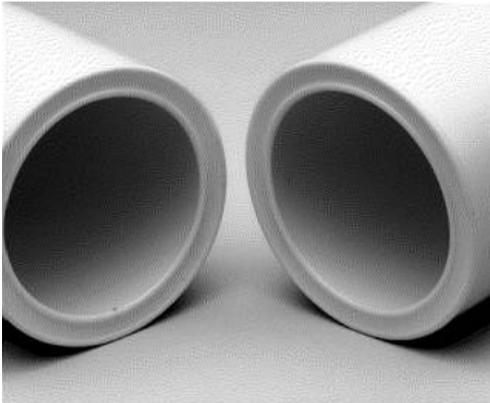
Figure A. UNACCEPTABLE APPEARANCE – Improper Concave Melt Surfaces after Heating; probably caused by heating under pressure.
